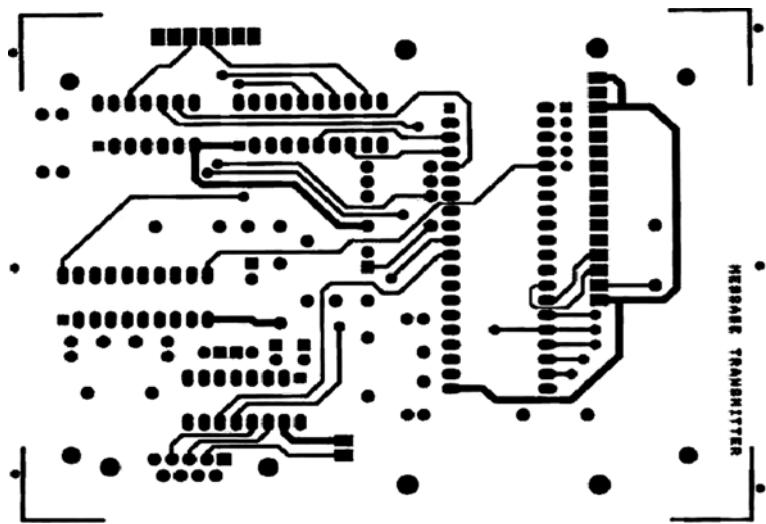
PCB (*top layer*) layout of wireless message device for mines
